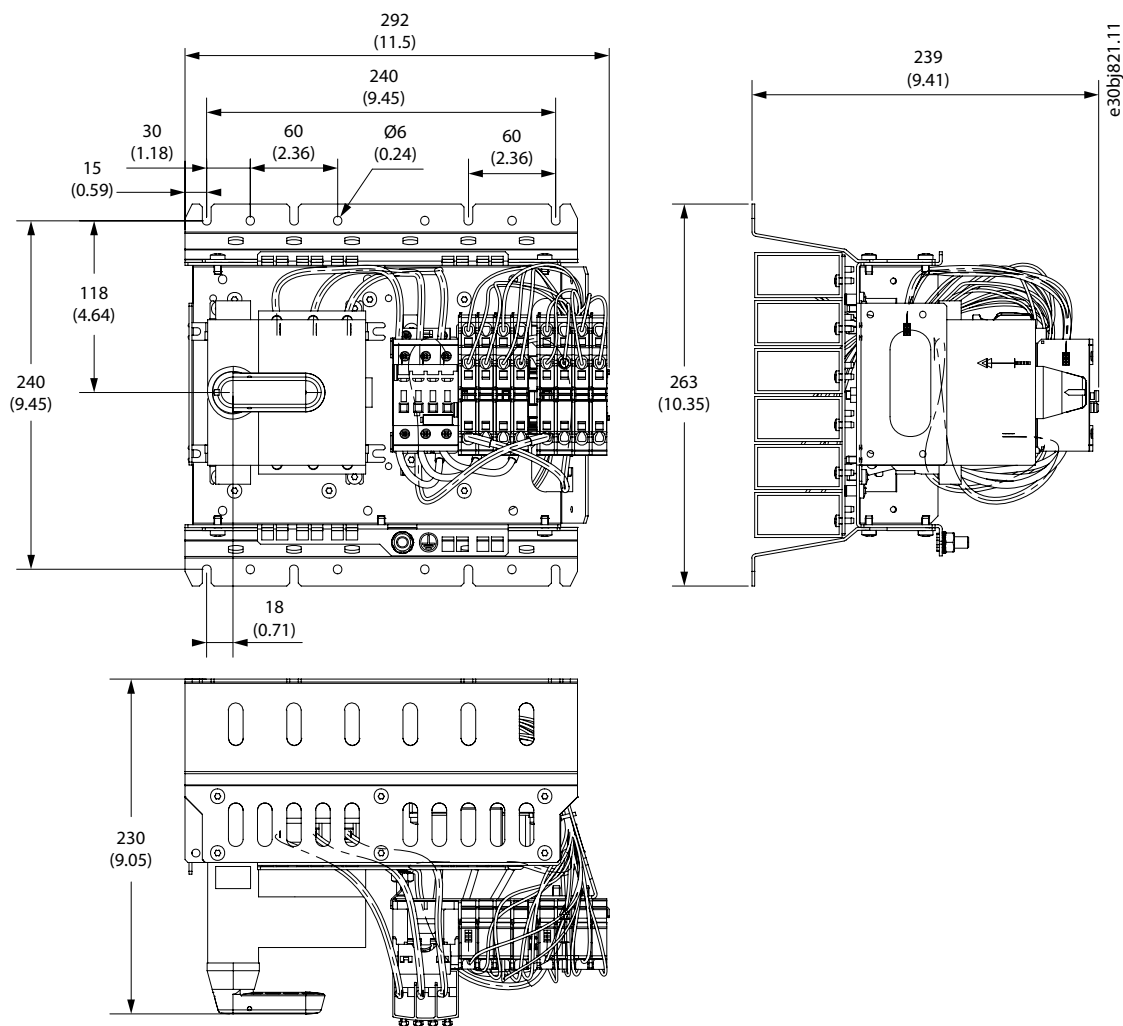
Dimensions of the Pre-charging Unit in mm (in), IEC
